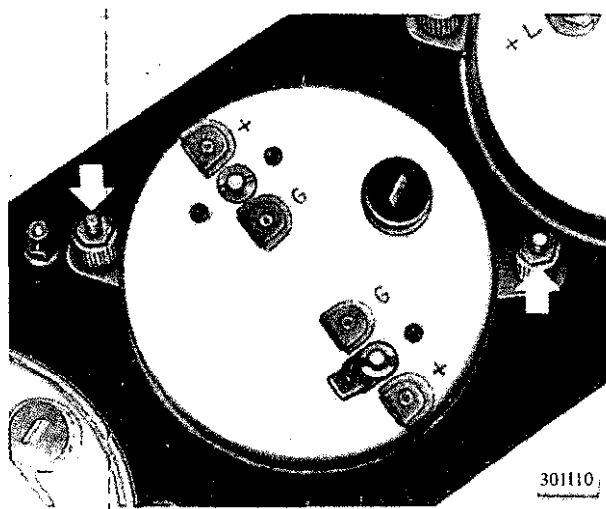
I-10 Rear View of Temperature Indicator and Fuel Gauge Dash Unit
